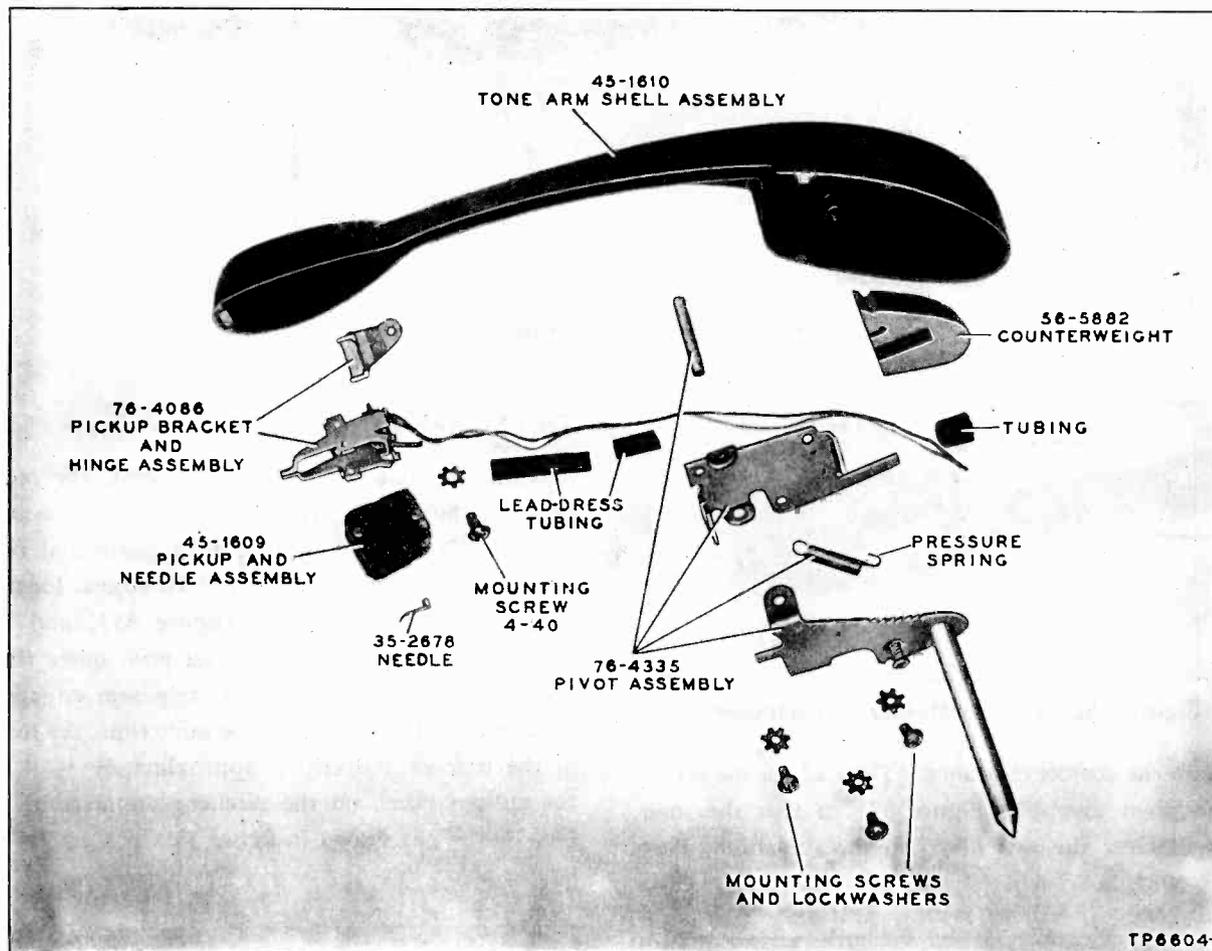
Record-Player Tone-Arm Assembly, Part No. 35-2686
